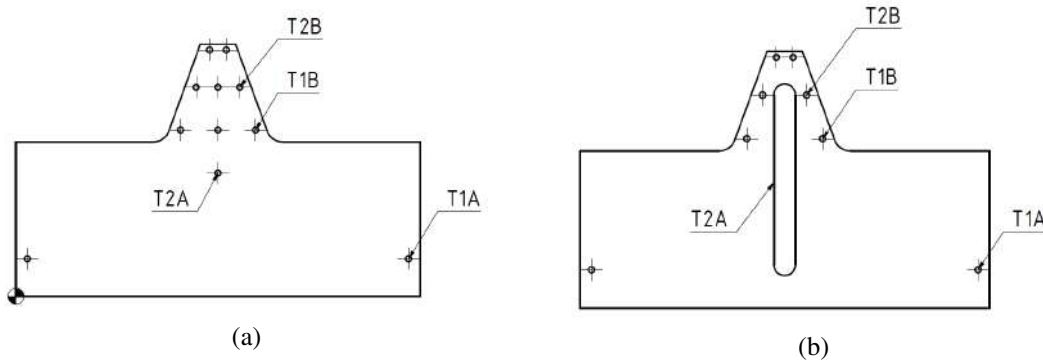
DIC: Standard tooth (a) and hybrid tooth (b) with bore holes for thermocouple.
